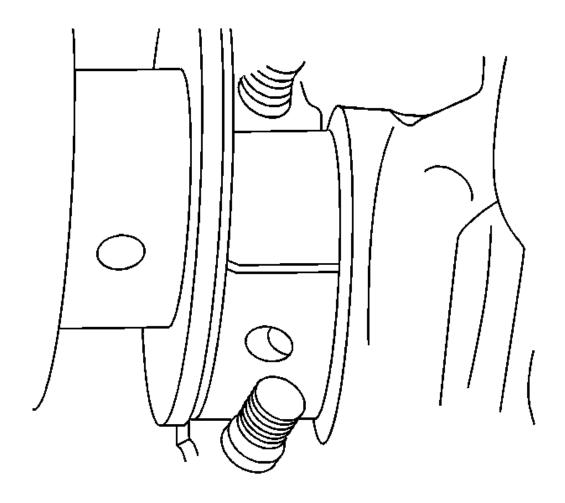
View Of Gaging Plastic Installed On Crankshaft Journal Courtesy of GENERAL MOTORS CORP.
